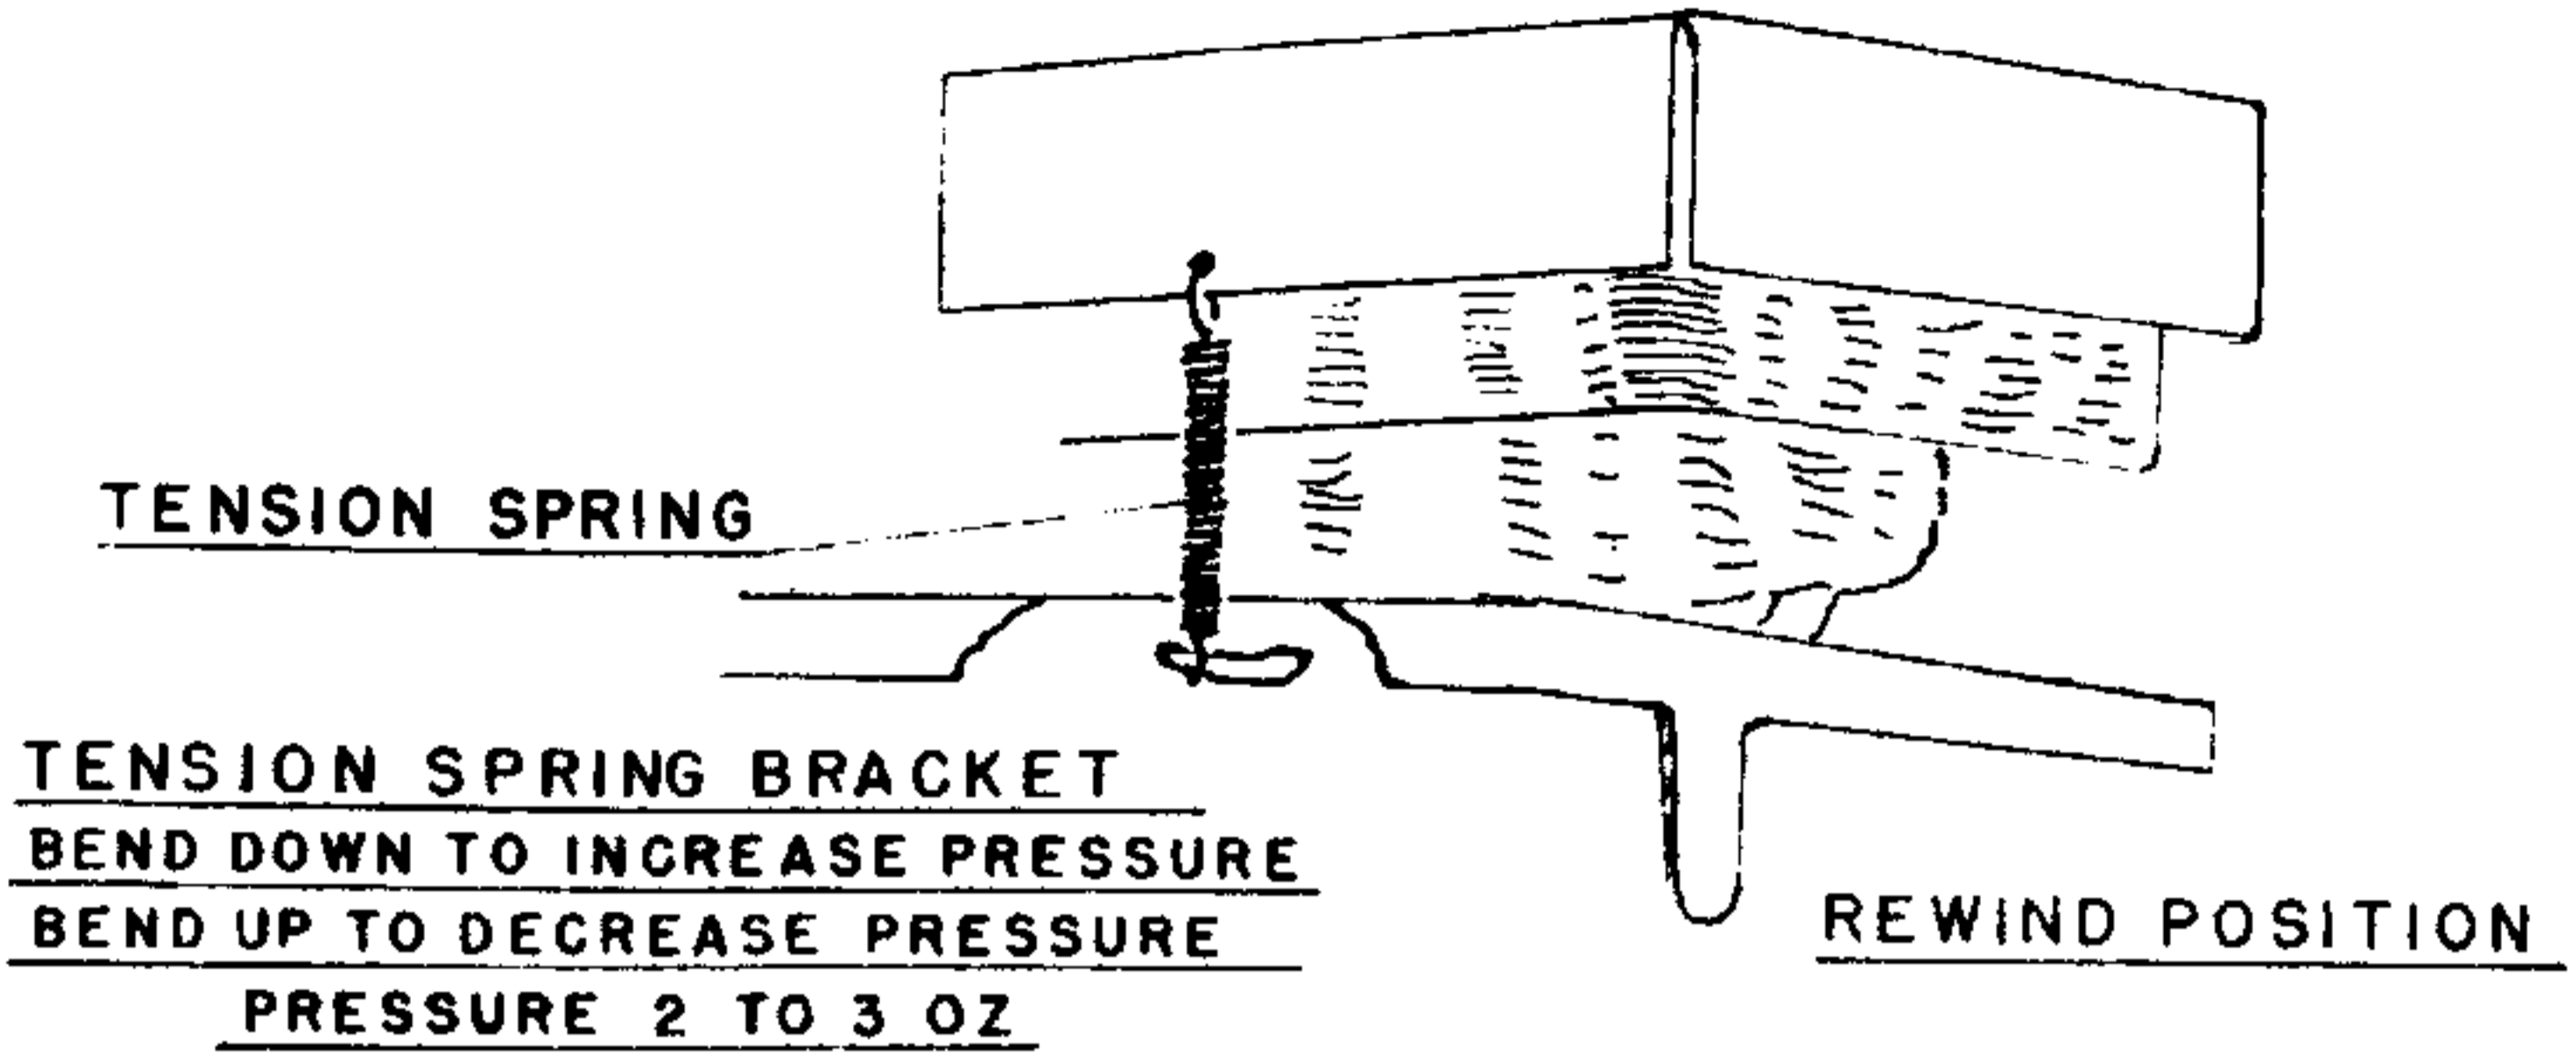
MOTOR SUSPENSION ADJUSTMENT
